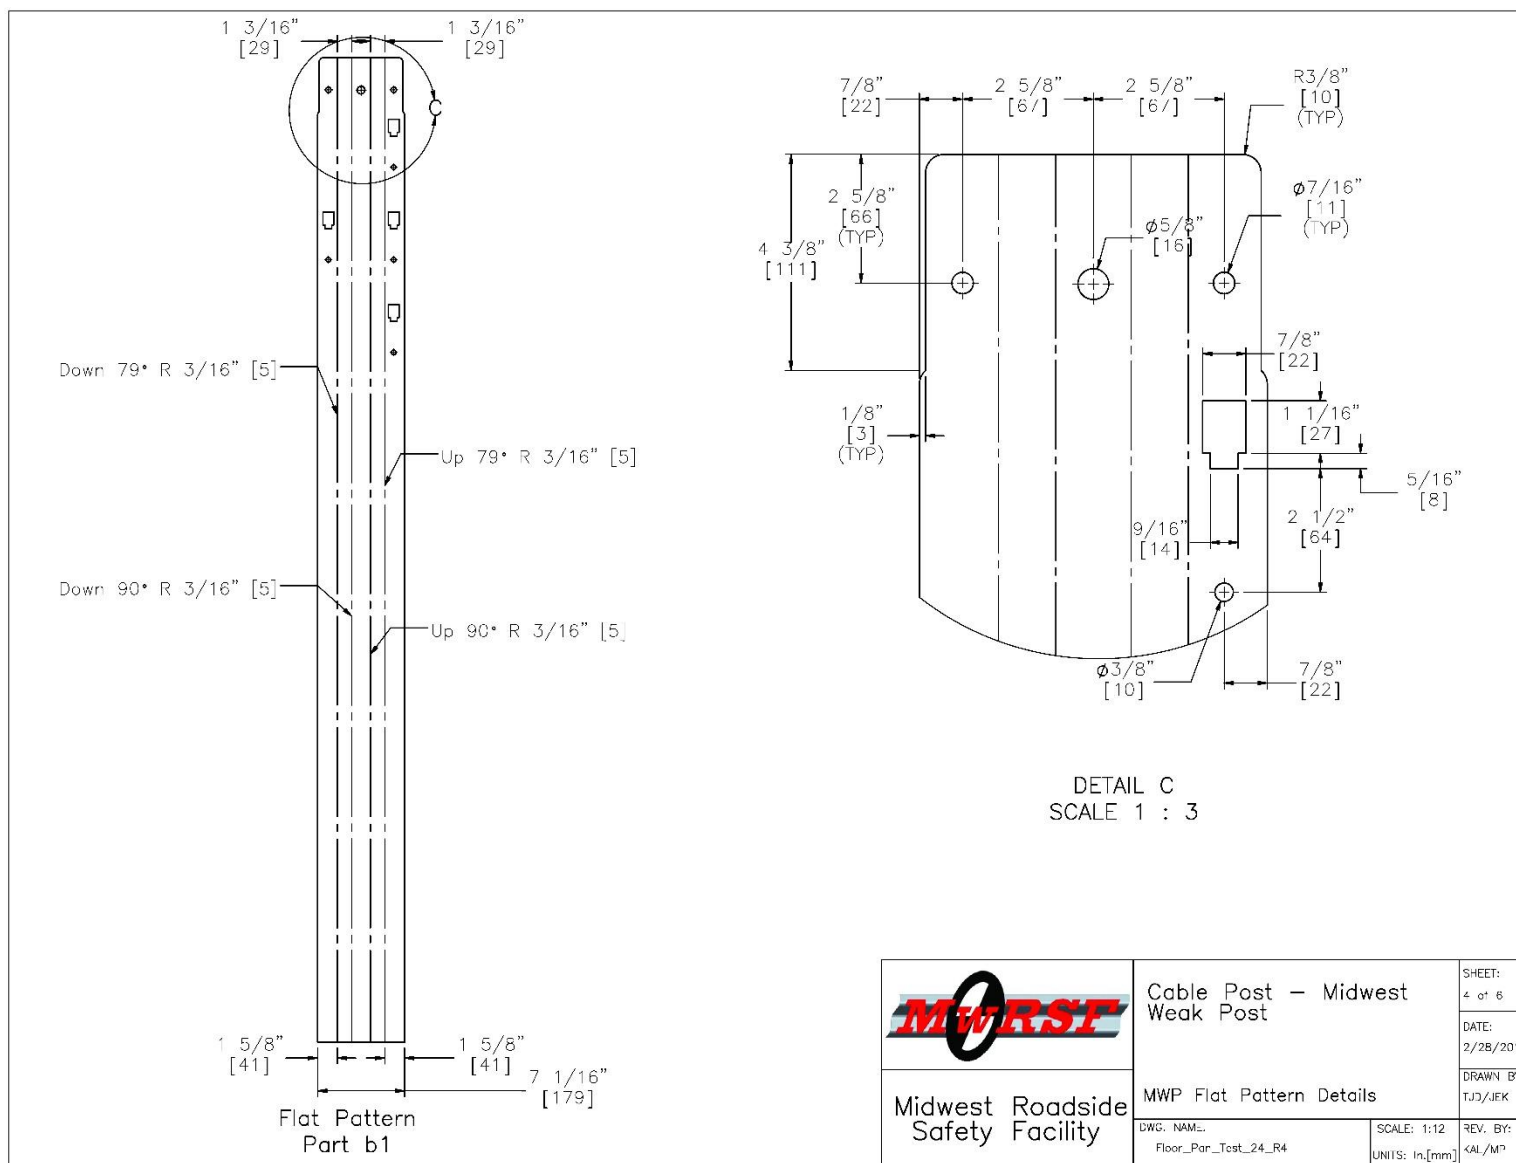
MWP Flat Pattern Details, Test No. MWFP-24
